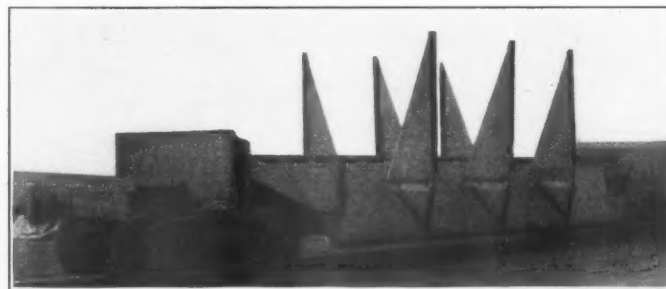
Ends and Floor Section Assembled and Side Gusset Straps in Place
